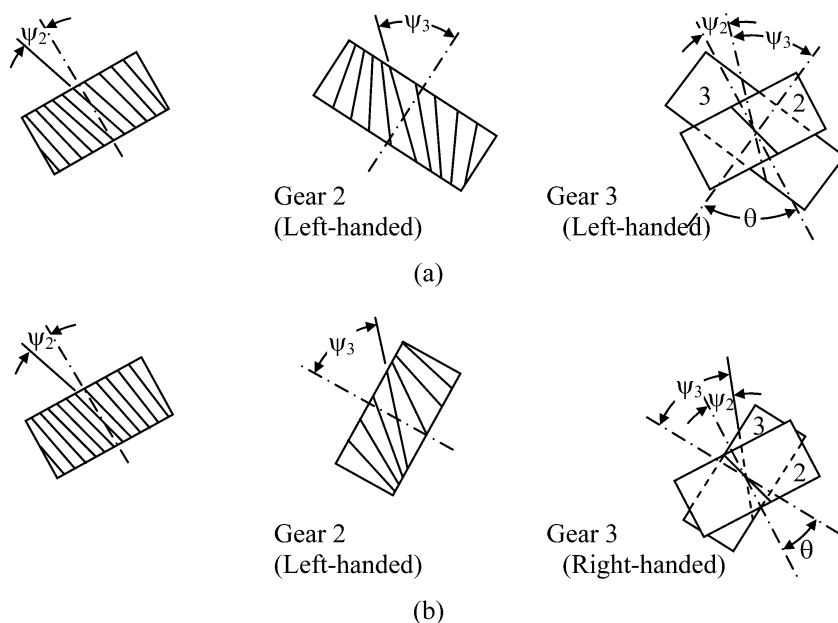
(a) Two left-handed helical gears. (b) Two gears with opposite helix angles
